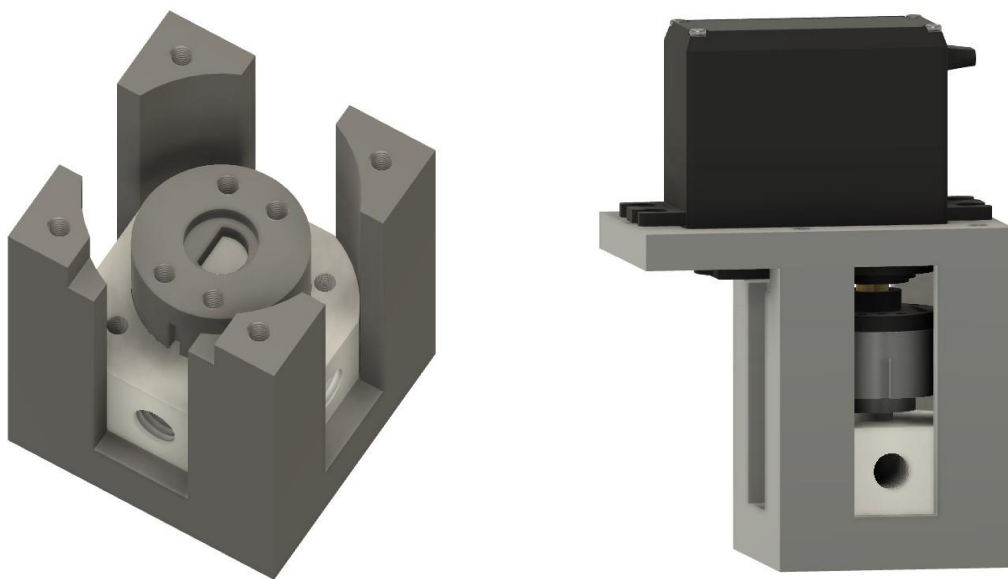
Left: 3D model of the designed high-pressure valve holder with the axle coupler. Right: 3D overview of the high-pressure valve in the holder along with the couple and servo-mechanism in its holding frame.
